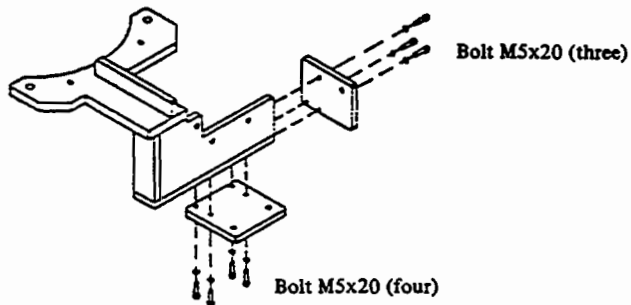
(a) Assembly of fixture base (S-10)
